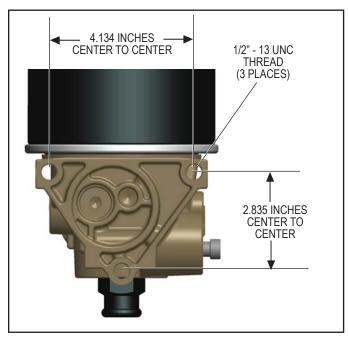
BENDIX® AD-RP™ SYSTEM PURGE AIR DRYER MOUNTING BRACKET DIMENSIONS
